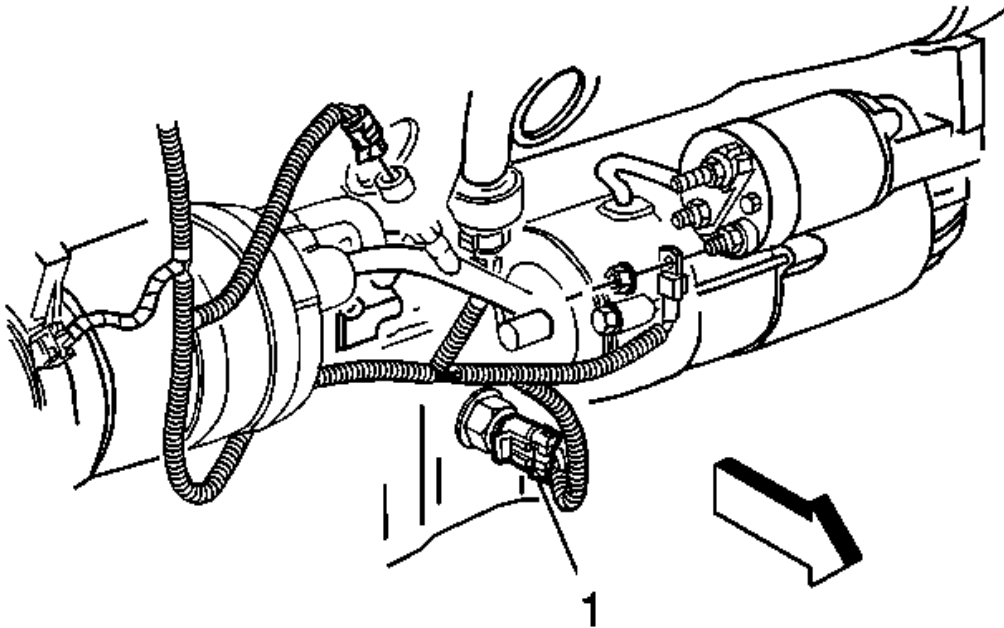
View of Engine Oil Level Sensor Electrical Connector
